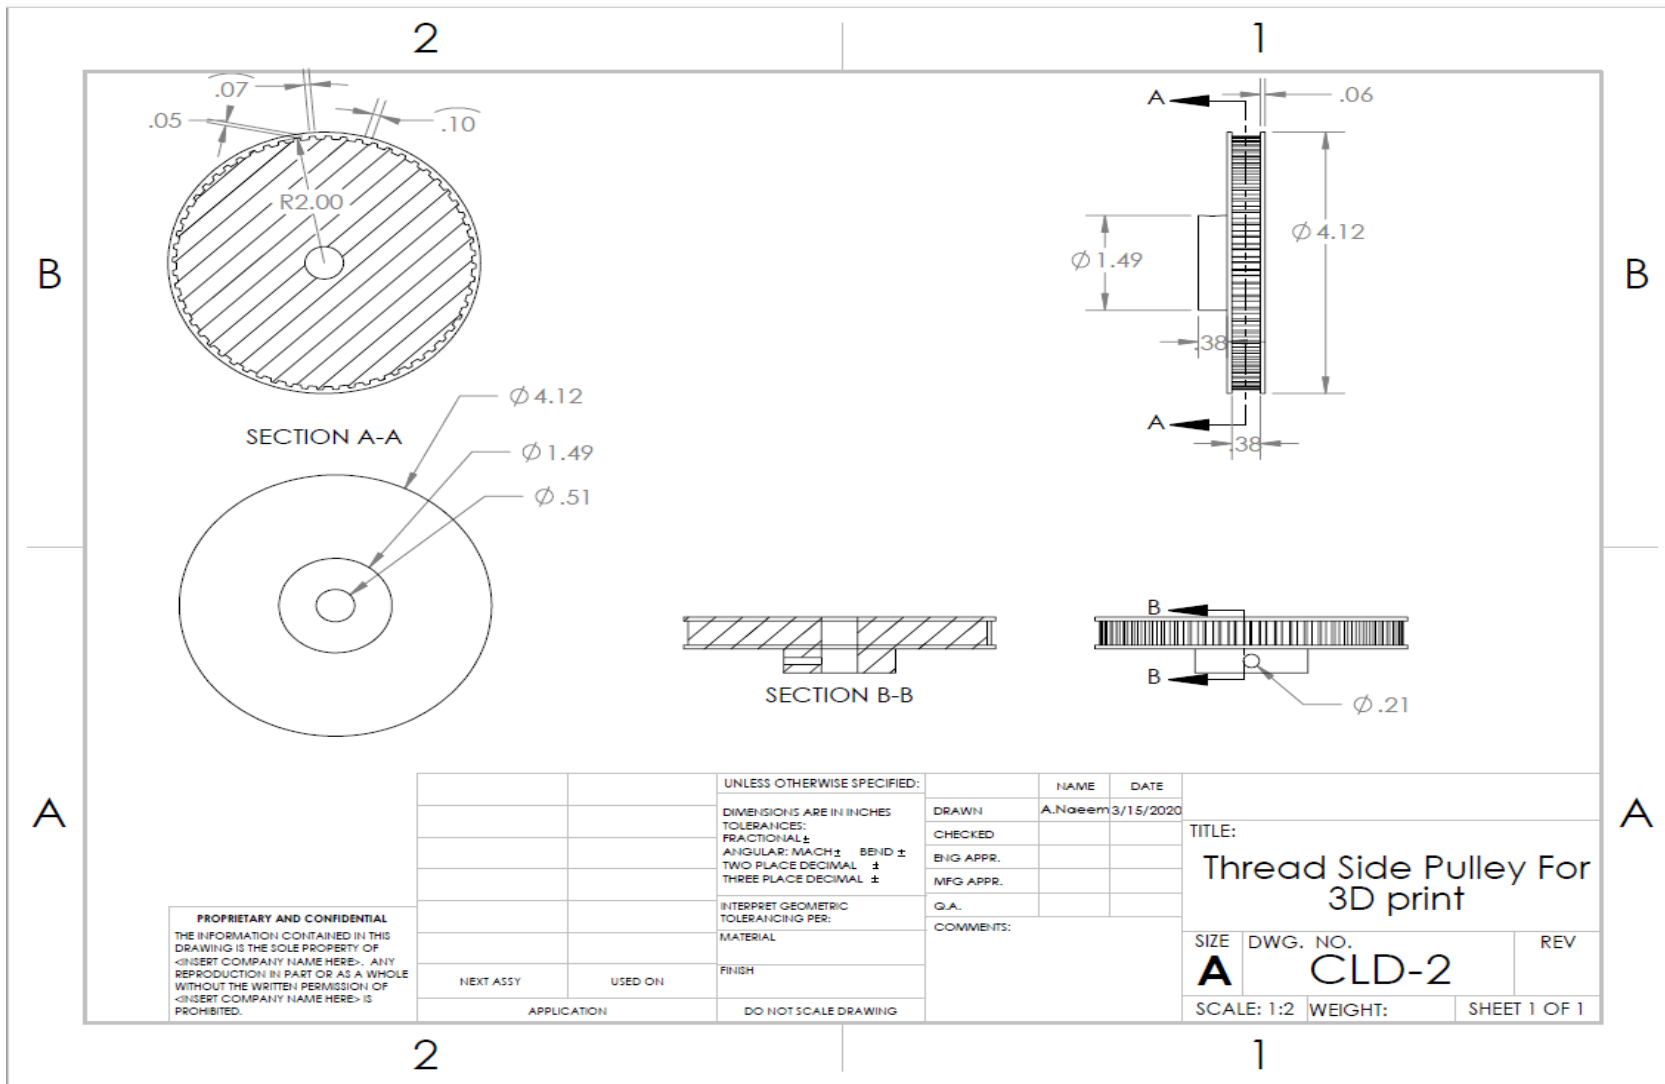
Engineering Drawing for the Large Pulley (Designed for 3D Printing)
